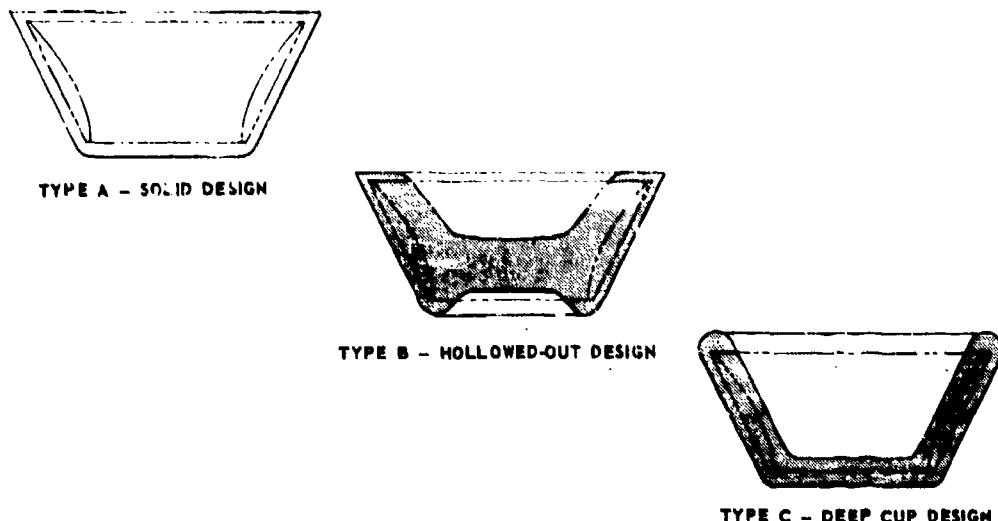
THREE TYPES OF FORGING DESIGNS FOR PRODUCING TUNGSTEN ROCKET NOZZLE SHAPES
